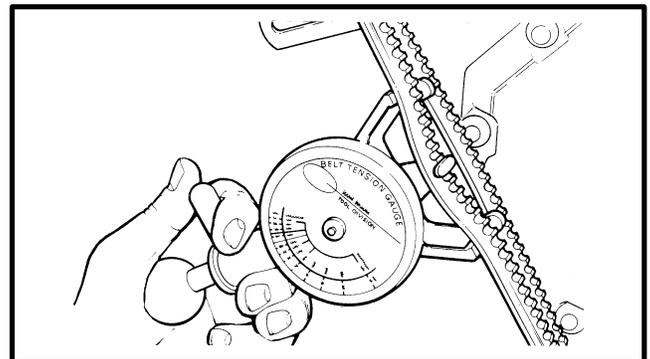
GAUGE TO CHECK DRIVE BELT TENSION
